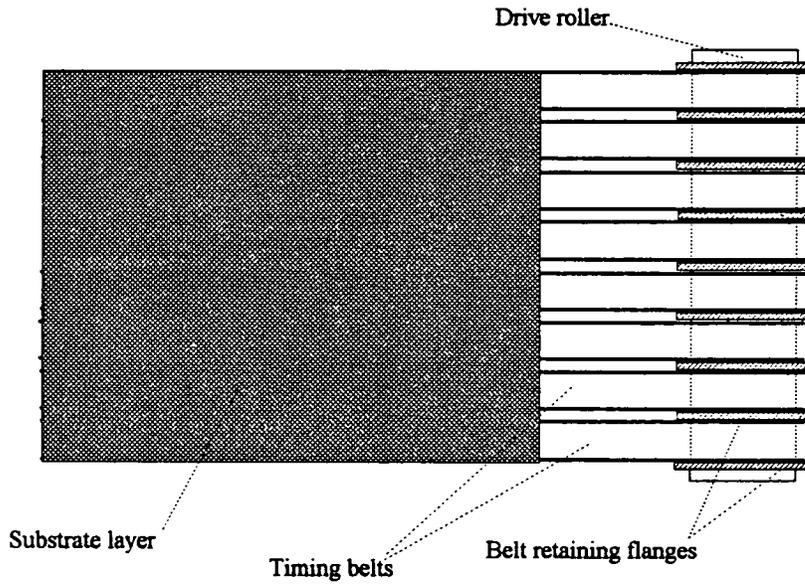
The structure of the lower conveyor, part of the twin belt feed mechanism
